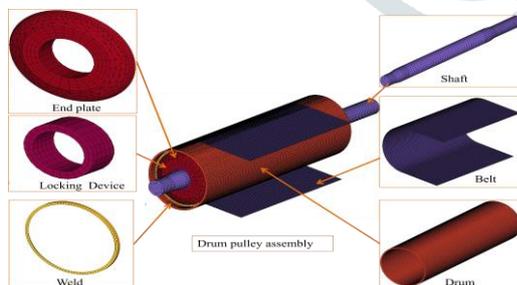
Exploded View of Meshed Drum Pulley Assembly
